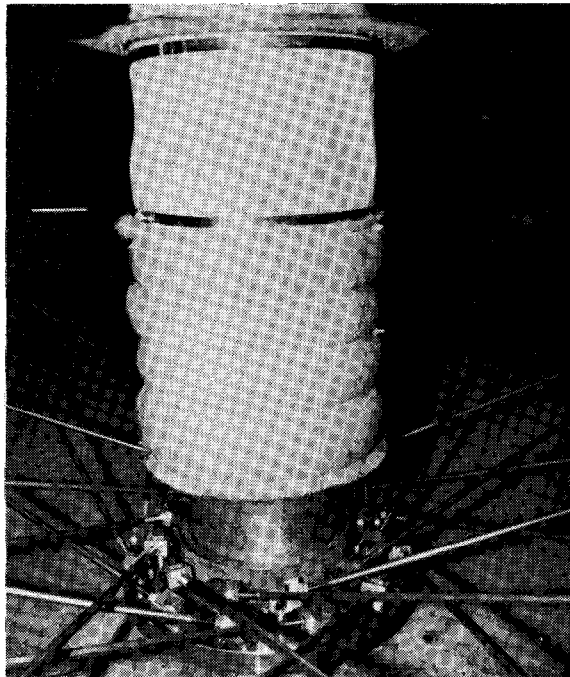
Rear Flange, Hub, Rear Spokes, and Internal Filter Assembly During Final Field Assembly. Rear Membrane is Not Yet Installed at This Time.
